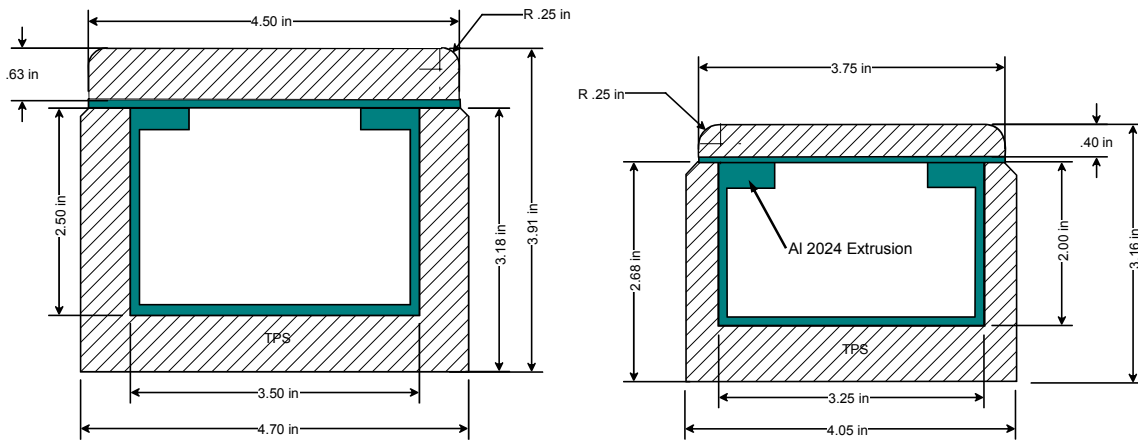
Cross Sections of LH₂ and LO₂ Cable Trays.
